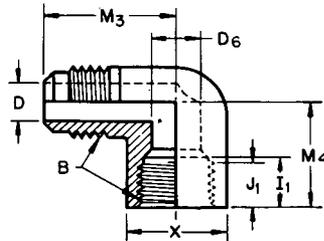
INTERNAL FLARE TO EXTERNAL FLARE 90 DEG ELBOW
